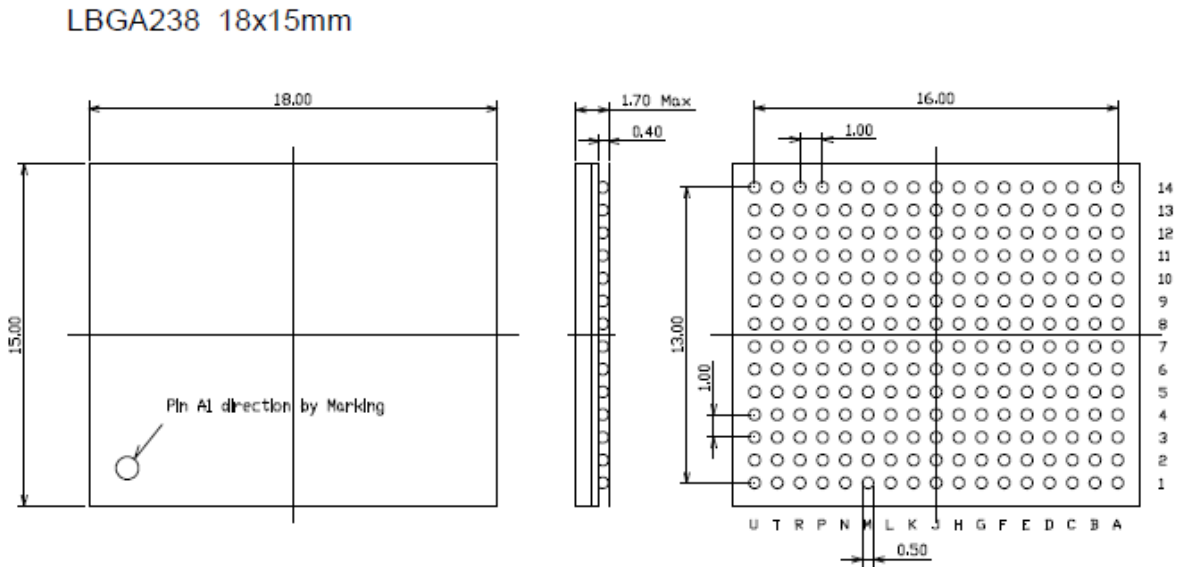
MLKHN1501 package outline (LBGA-238 pins)
